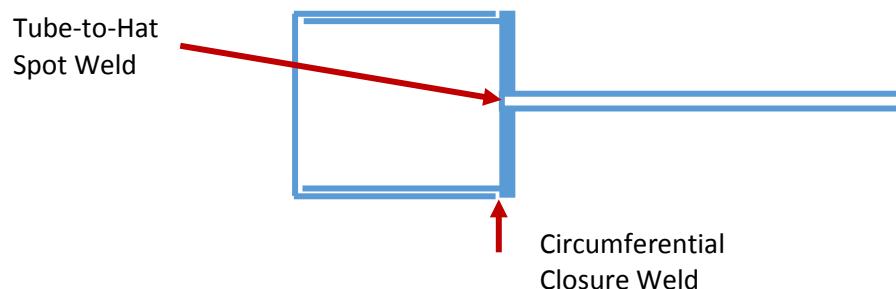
Schematic of fission chamber showing location of welds.
